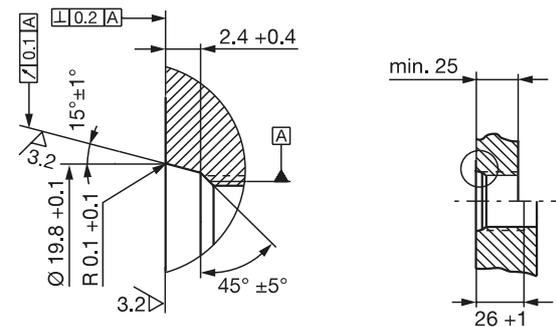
Mounting hole M18x1.5 per ISO 6149 O-ring 15.4x2.1
